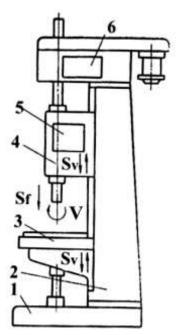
Upright drilling machine: 1 bed; 2 - column; 3 - table; 4 - spindle; 5 - feed gear box; 6 - speed gear box; V - spindle (tool) revolution; $S_f -$ feed motion; $S_v -$ vertical motion of table 3 and feed gear box 5
